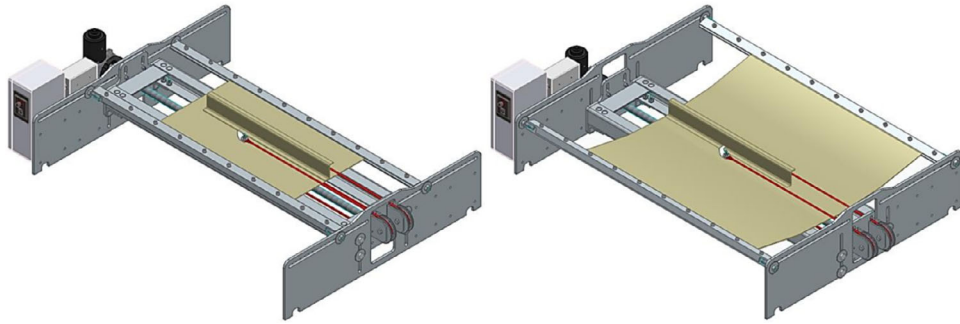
| CAD sketch of the realized disassembly test stand.
